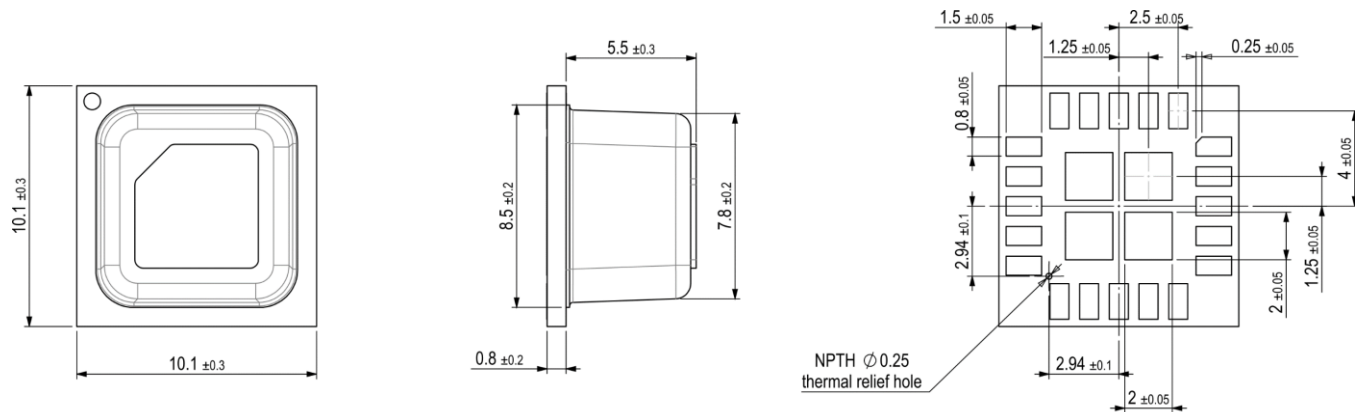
Sensor package dimensions of SCD4x: top, side and bottom view (left to right, projection method 1). All dimensions in millimeters.
